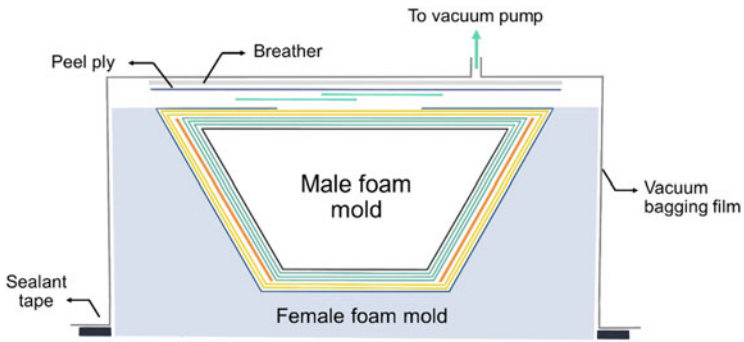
Schematic of a vacuum bag lay-up with a co-cured mold technique
